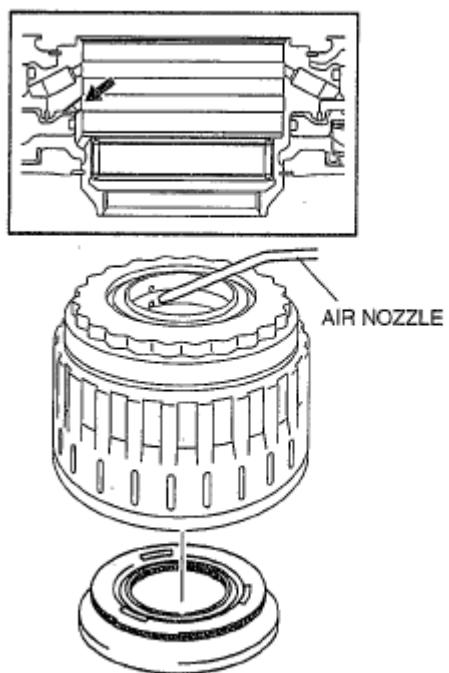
Identifying Seal Plate And C2 Clutch Piston Return Spring
